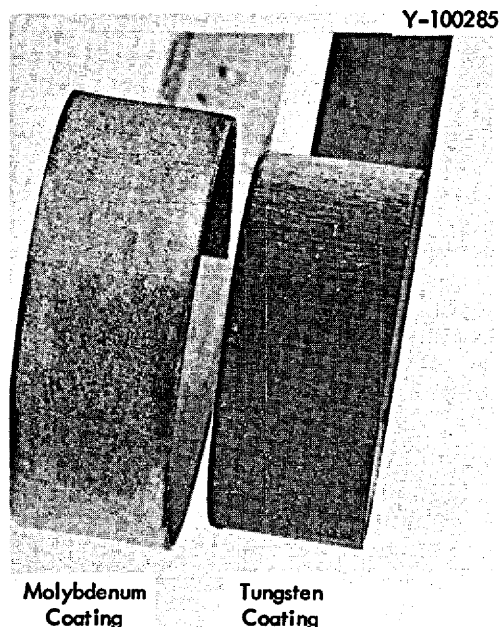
Inconel 600 Bend Specimens Showing Cracks in the Coatings.
